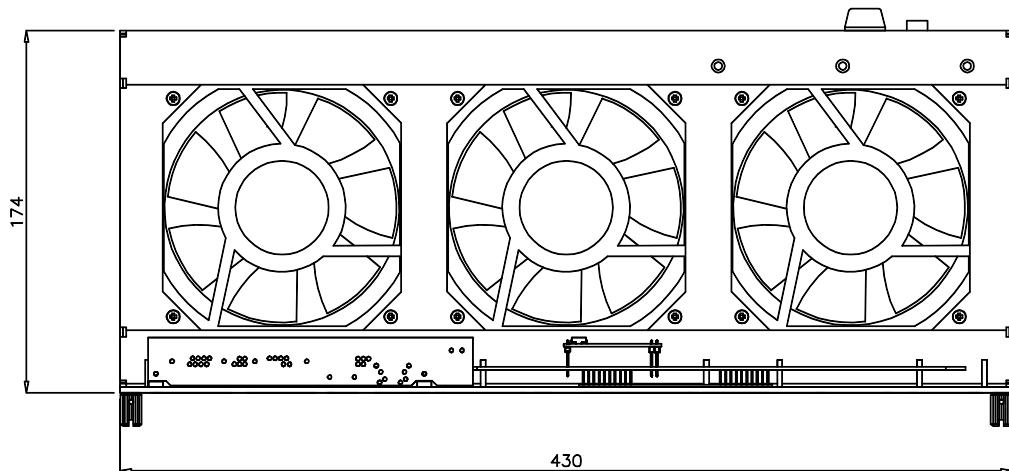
Mod A8160 Smart VME Fan Unit Top view
